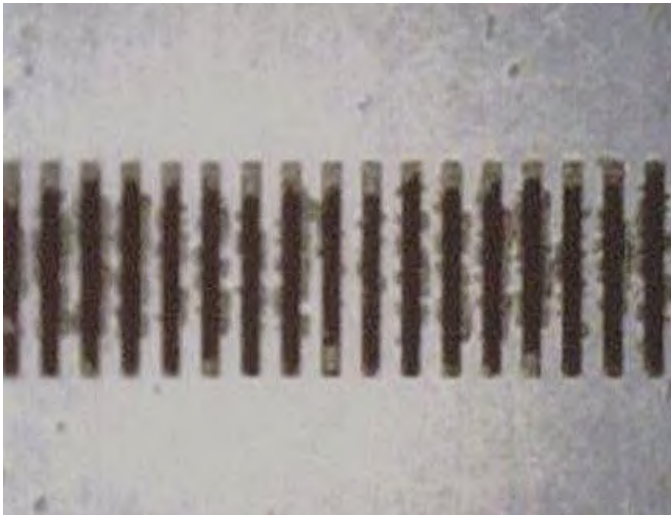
Solder paste 'bleeding' at the bottom of the stencil.
